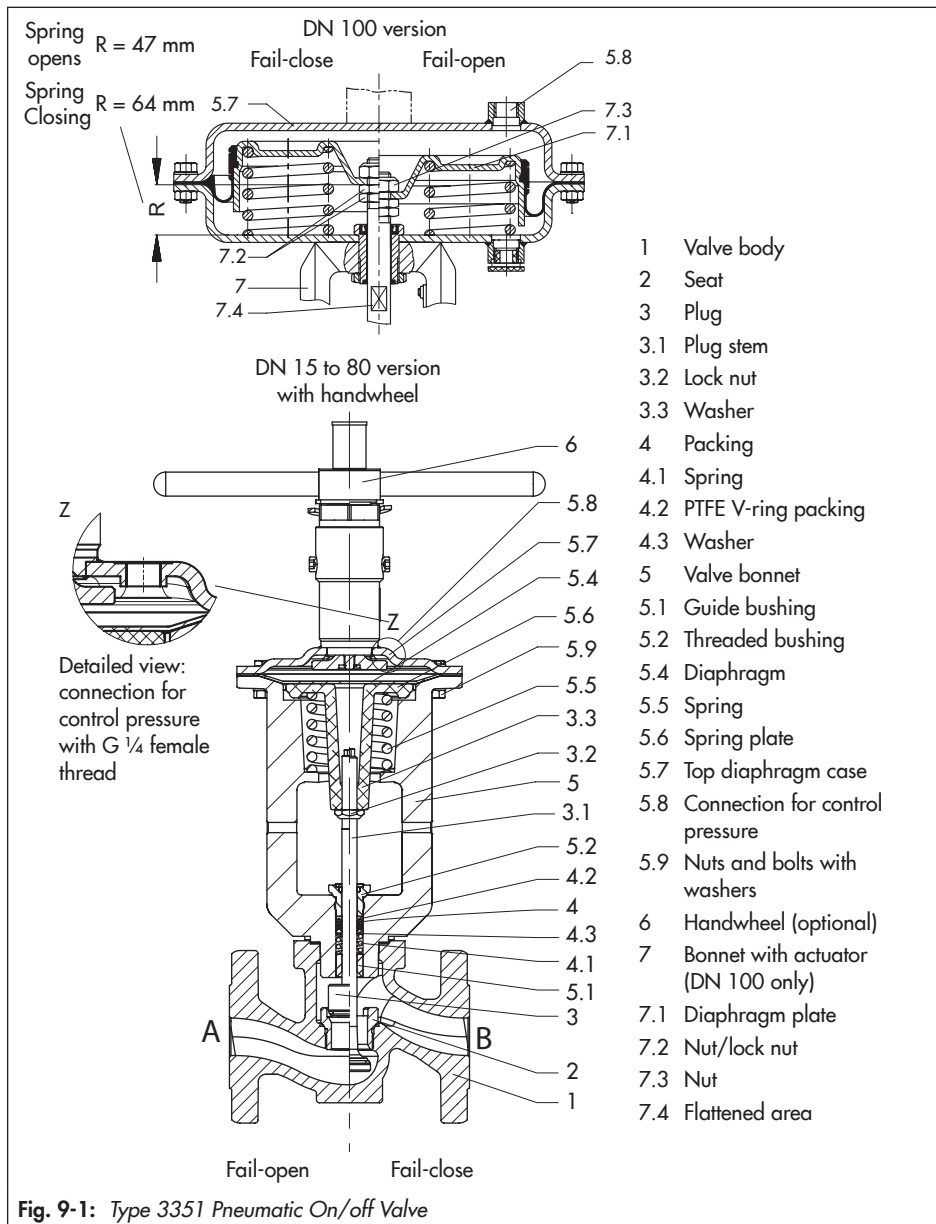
Type 3351 Pneumatic On/off Valve
